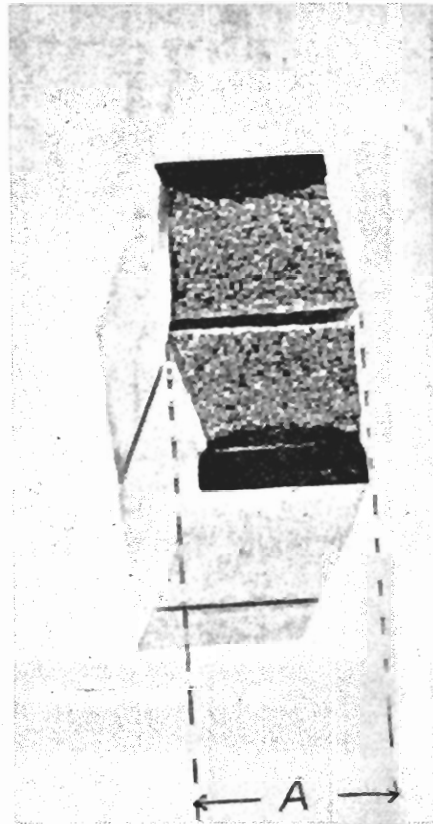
Halves of Broken Charpy V-Notch Impact Specimen Joined for the Measurement of Lateral Expansion, Dimension *A*.
